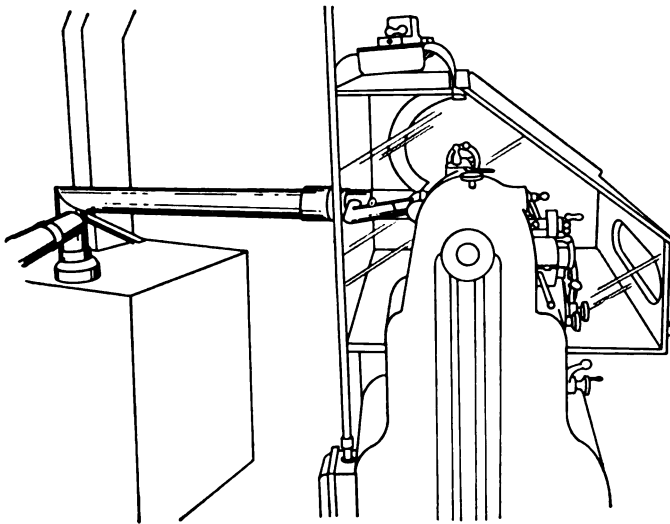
Lathe hood with internal exhaust duct (side view).
